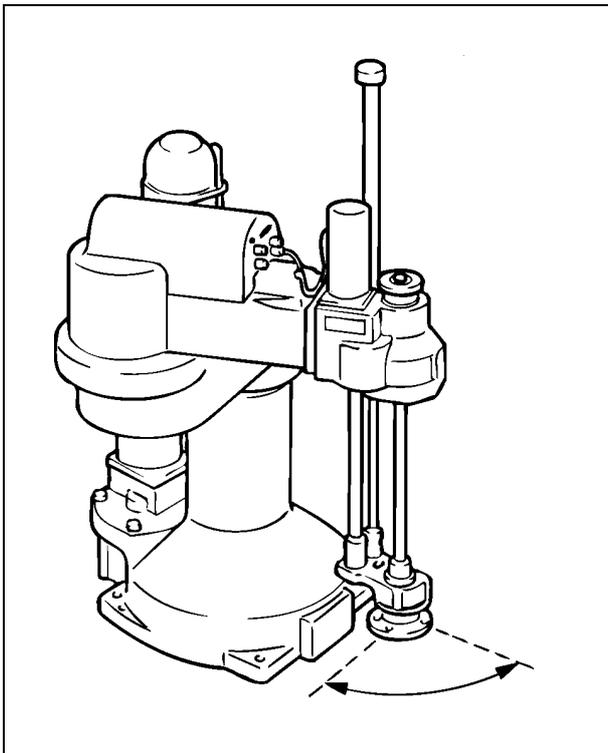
Manual Rotation of 4th Axis in X-Y mode, w/o Tool Definition
